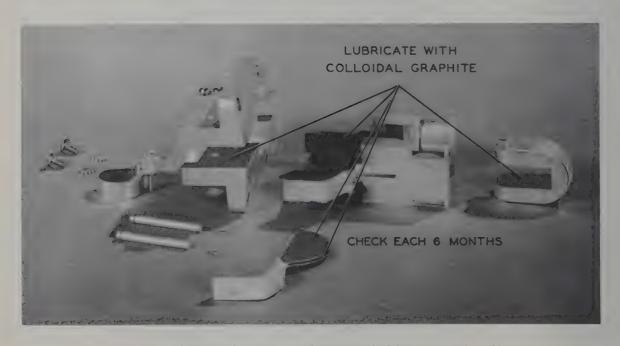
Lubrication of Antenna Coupling Network Sliding Contact Assembly.
